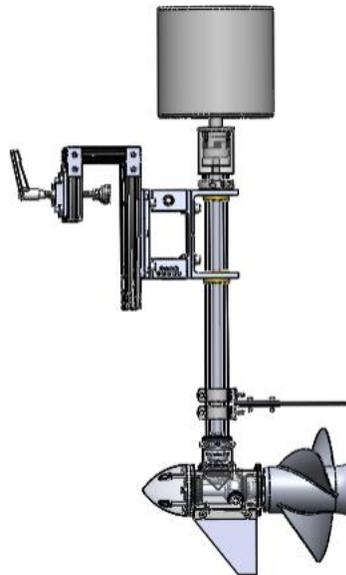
Cornell Full Assembly of Drive Train and Trim Angle Hull Mount [26].
